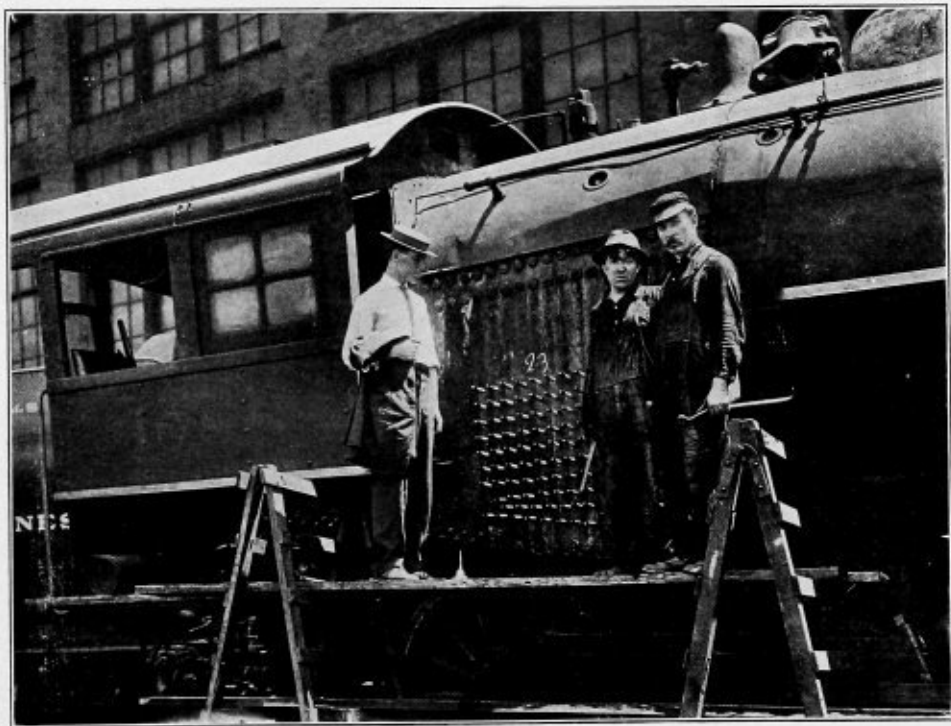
METHOD OF HOLDING SHEET FOR WELDING.
